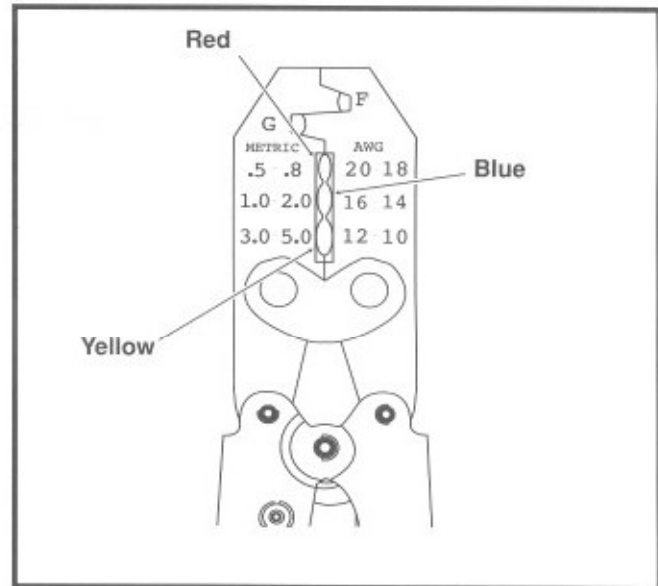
Packard Crimp Tool (HD-38125-8)
